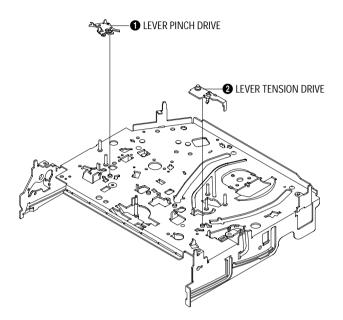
Lever Pinch Drive, Lever Tension Drive Removal
